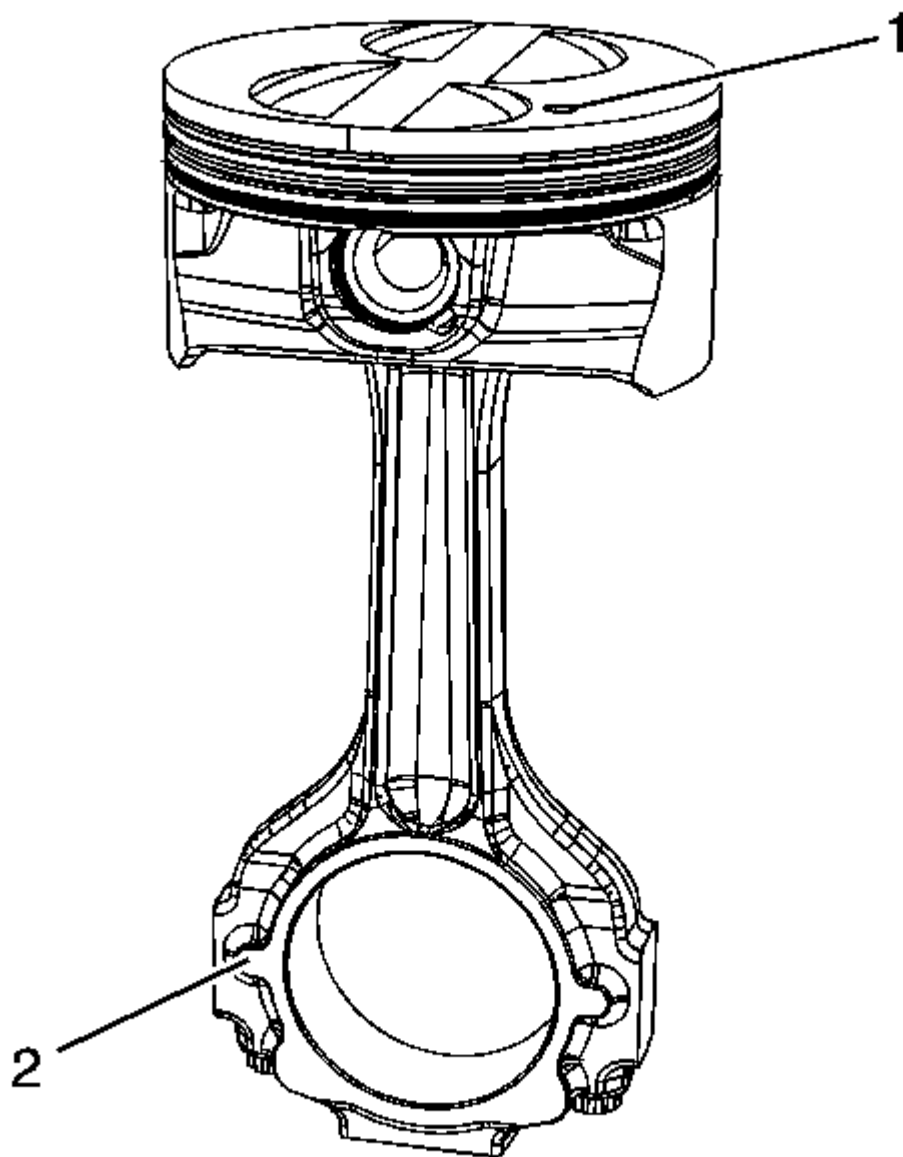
Identifying Proper Installation Direction Of Piston And Connecting Rod Assembly
